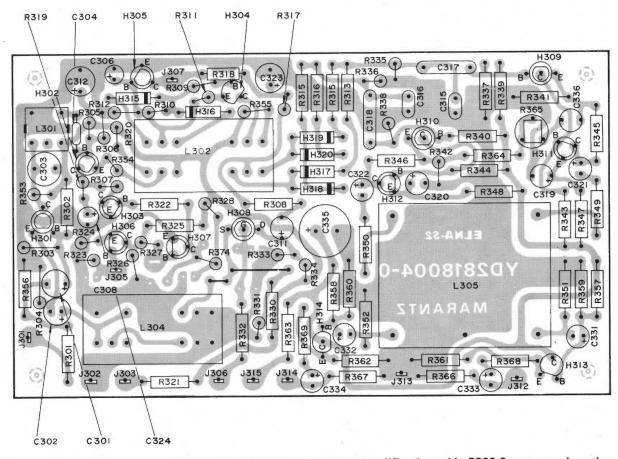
MPX Stereo Decoding Amplifier Assembly P300 Component Locations
